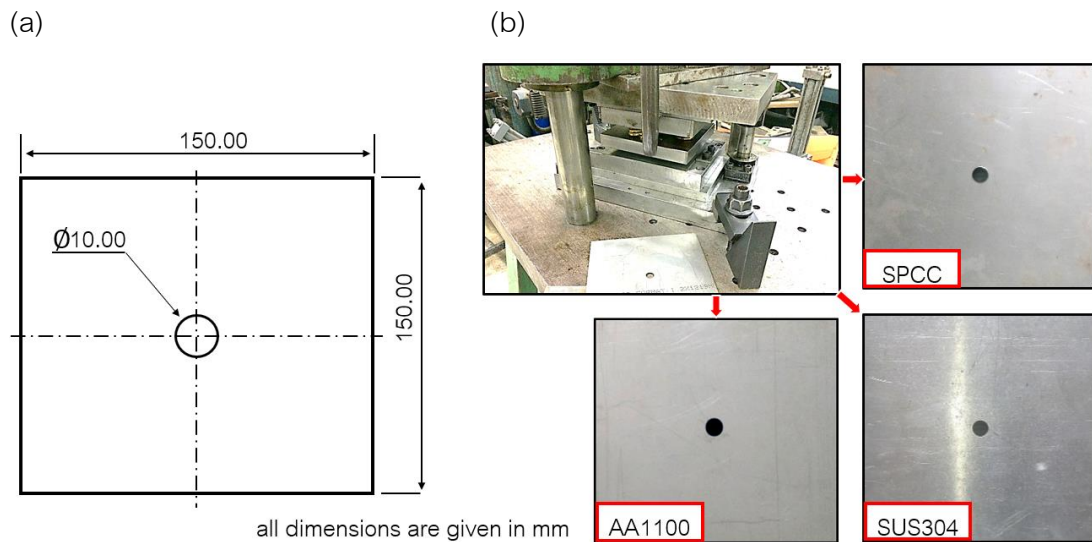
(a) Detailed specimen size for hole expansion test, and (b) Working piece after piercing process.
